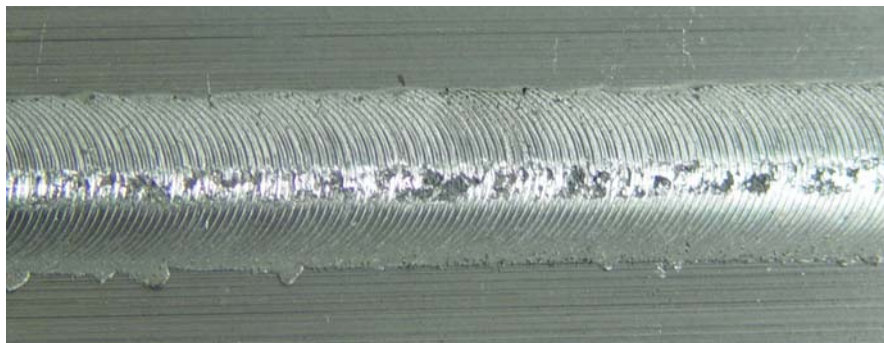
Weld Surface for 6000 rpm and 130 ipm.
